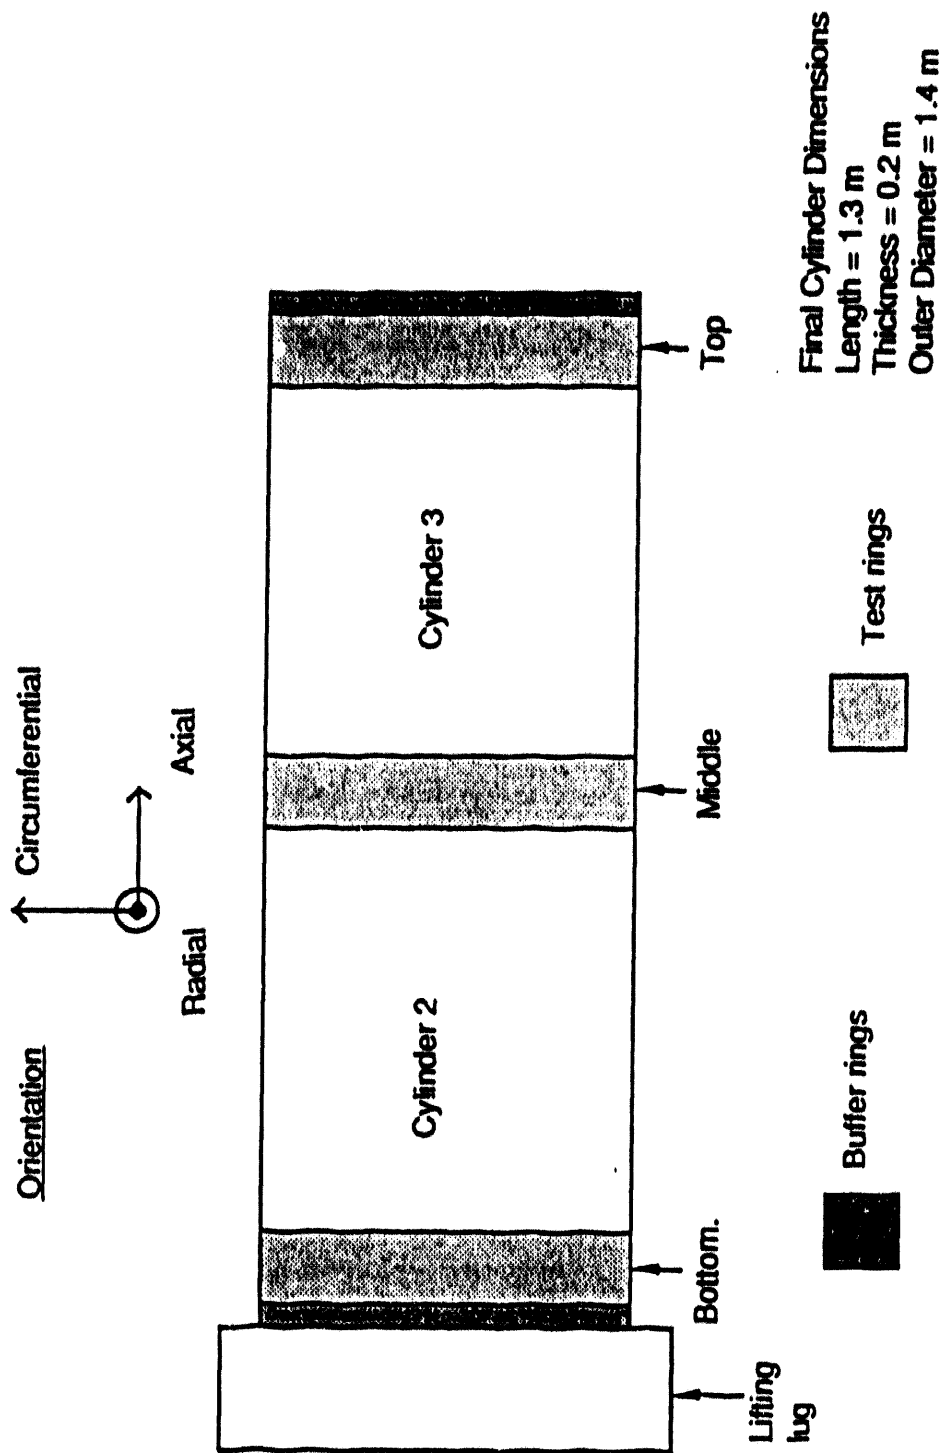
Location of SC-II Test Cylinder within the large-scale forging
